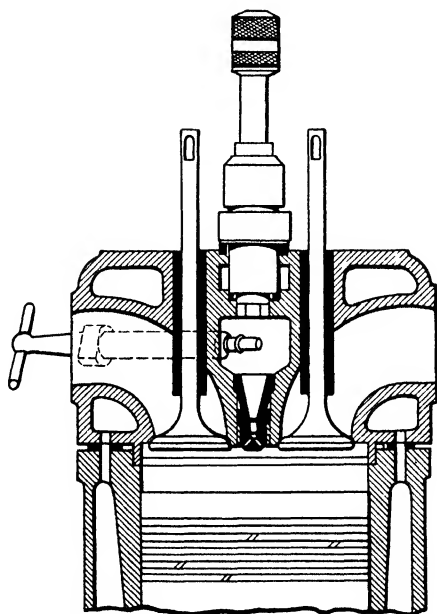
BENZ CYLINDER HEAD WITH PRECOMBUSTION CHAMBER.
